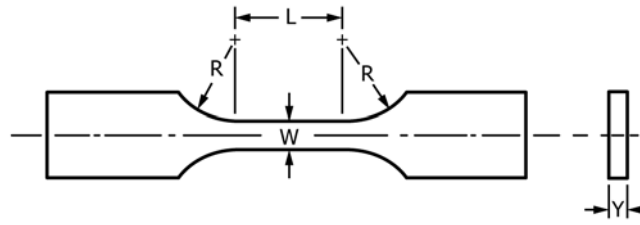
Specimens With Tangentially Blending Fillets Between the Uniform Test Section and the Ends
